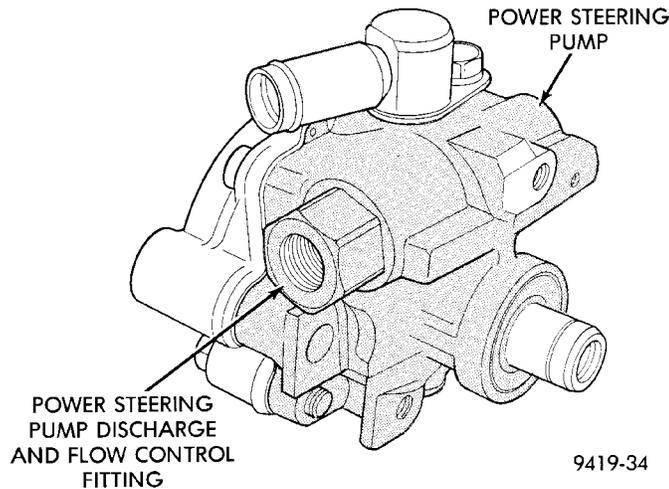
Pump Discharge And Flow Control Valve Fitting
